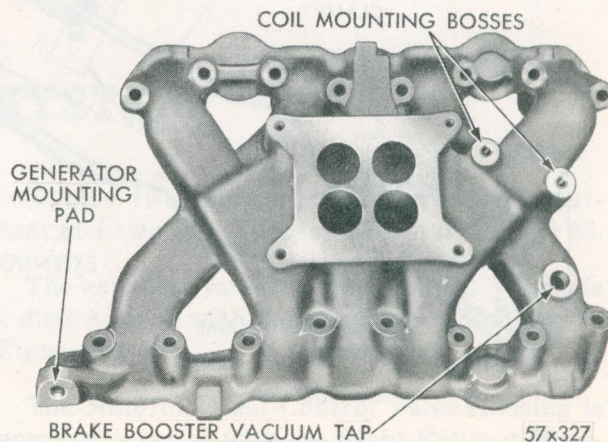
Intake Manifold (Double Rocker Shaft Engine)
